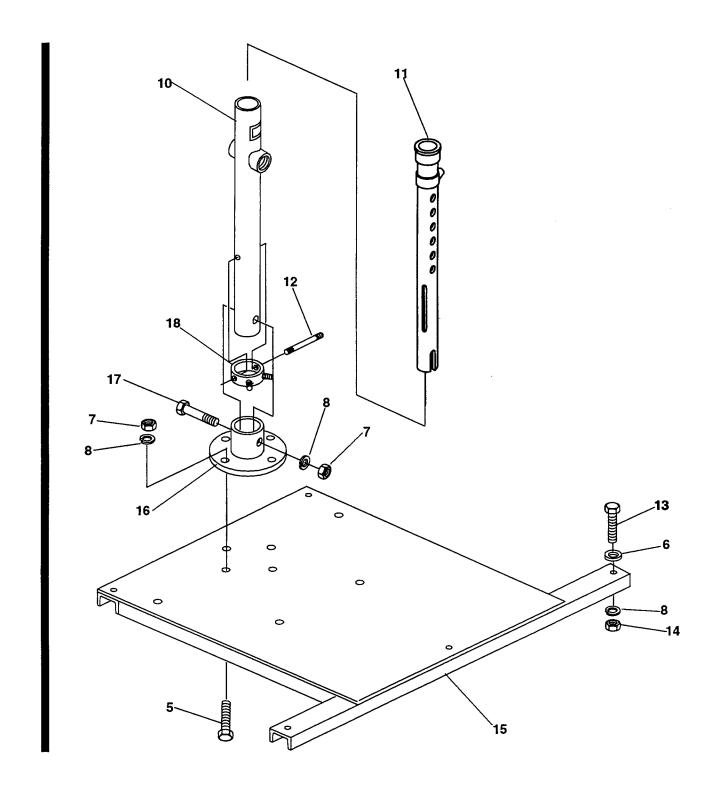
Mount, Pedestal, Machine Gun, M6 12956270 (Sheet 2 of 3)
